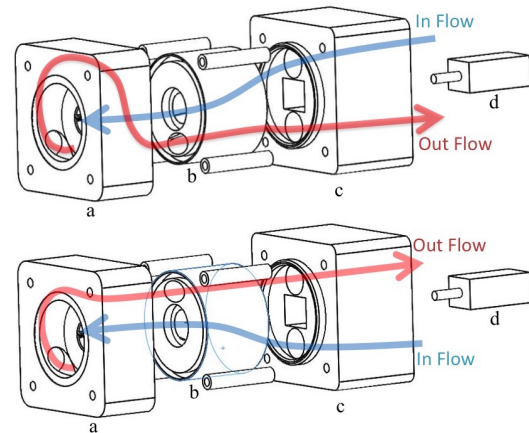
Exploded view of the rotating valve assembly with liquid flow arrows shown for two different orientations of the rotating valve (b).
